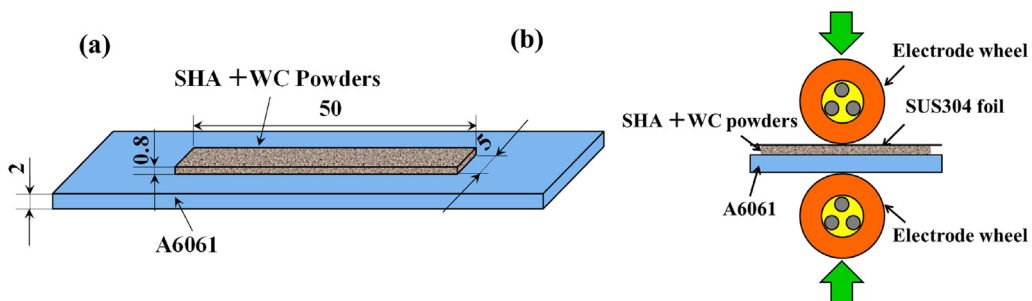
Schematic diagram of (a) sample; (b) resistance seam welding method.
